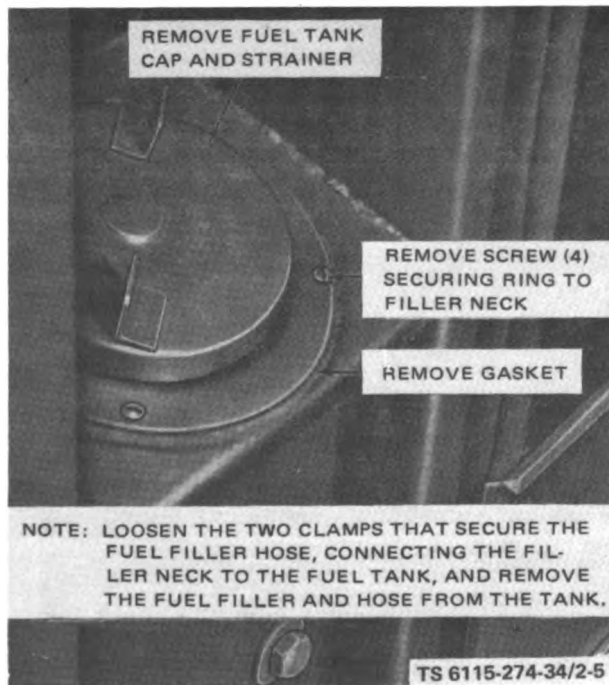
Fuel Tank Cap and Fuel Filler, Removal and Installation
